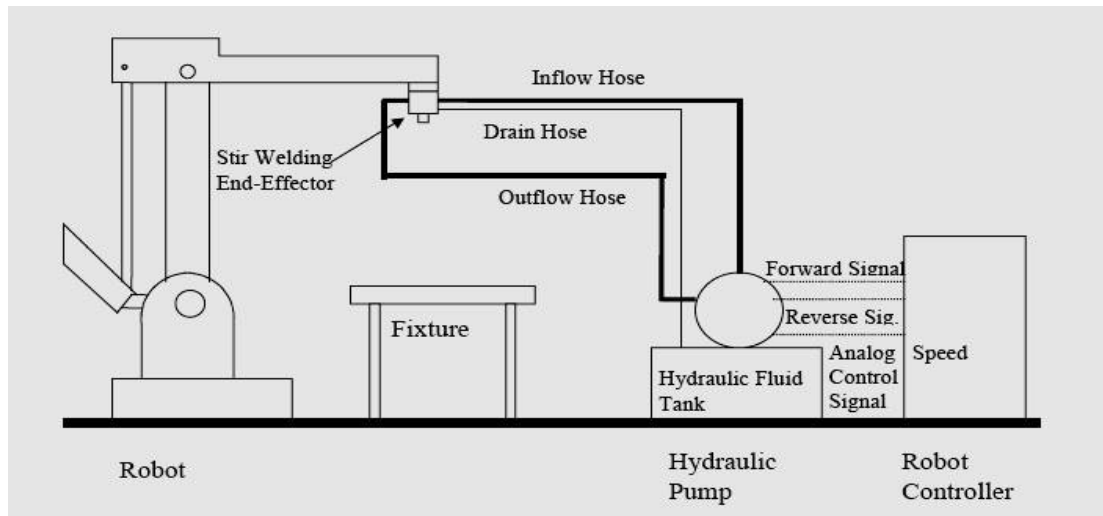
Friction Stir welding robotics setup for automobile industry
